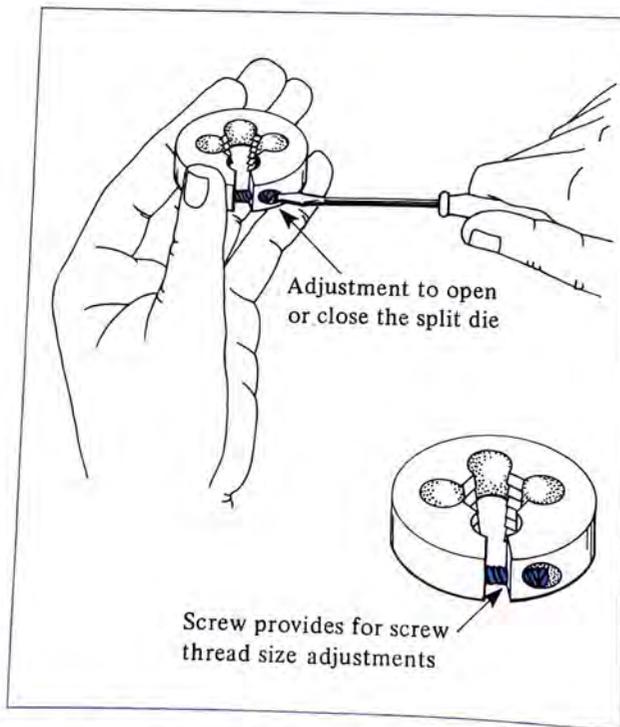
A Split Threading Die with a Screw Adjustment
